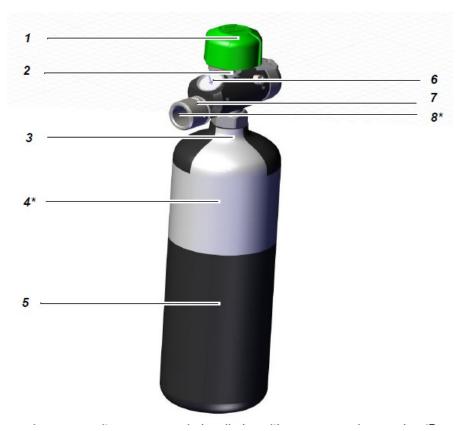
Overview composite compressed air cylinder with pressure reducer valve (PremAire)
